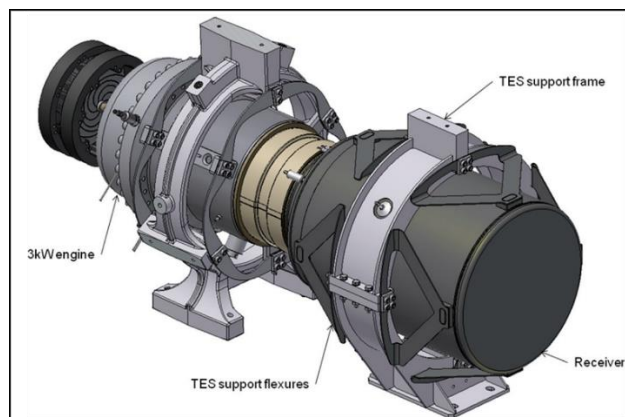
Stirling engine and TES module assembly (Ref. 5)
